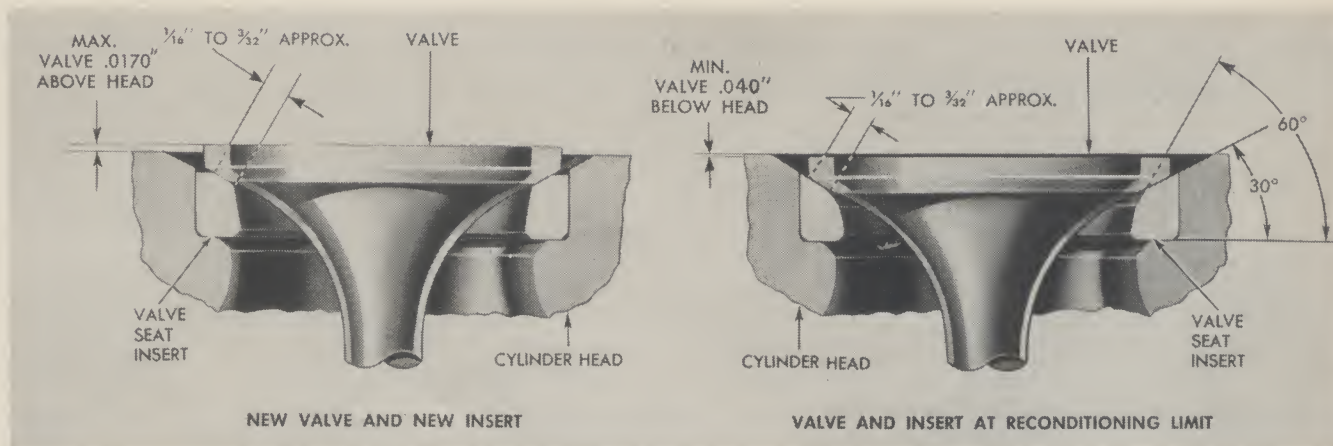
B—GM engine. Showing relationship of top of valve head to machined surface of cylinder head.
